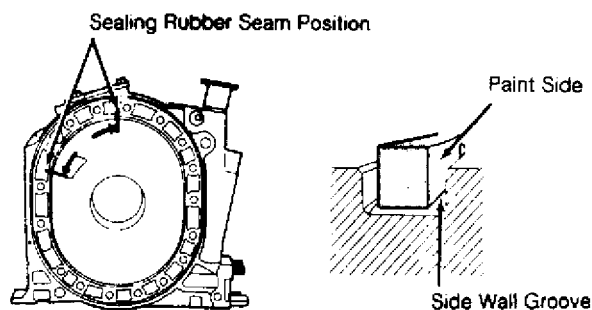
Positioning Sealing Rubber On Intermediate Housing
